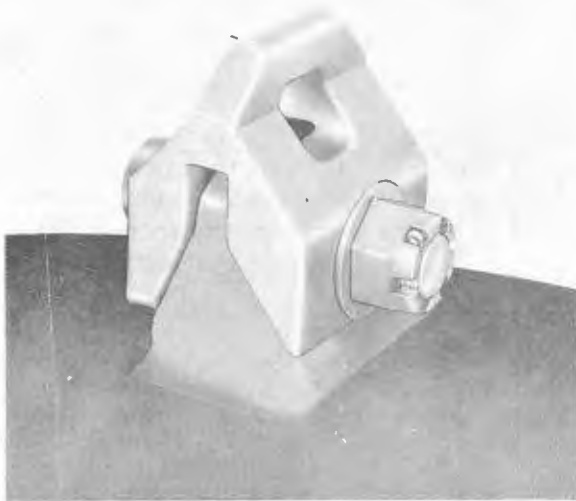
Lug Adapter Mounted on Forward Suspension Lug.
